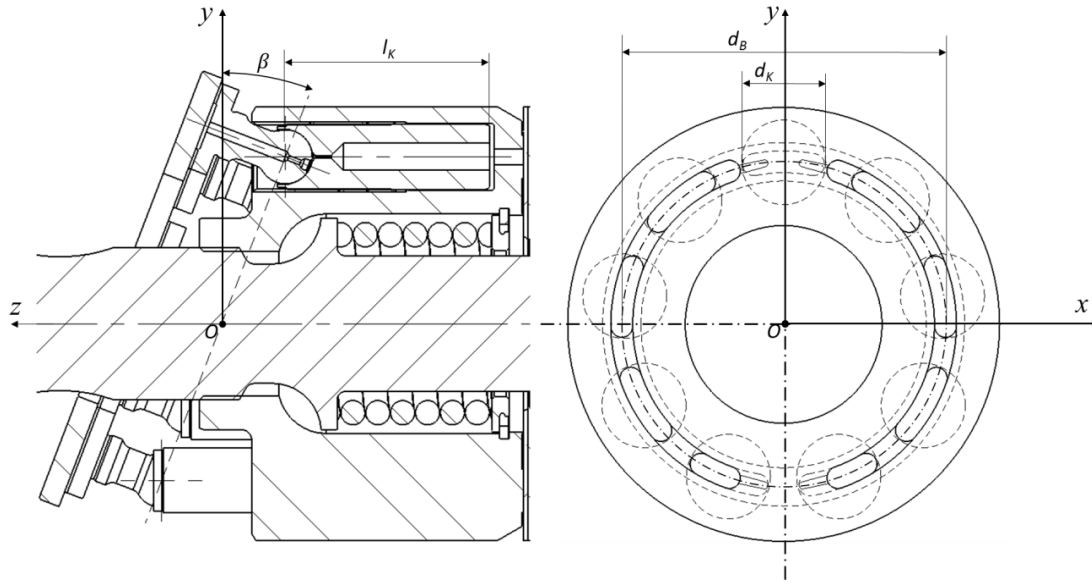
Main geometrical dimension of axial piston machines of swash plate type.
